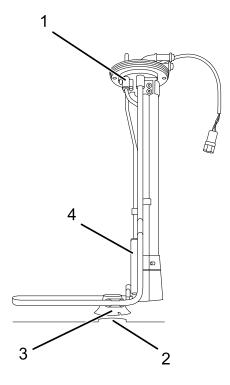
Diesel Exhaust Fluid (DEF) Tank Pickup Assembly.
